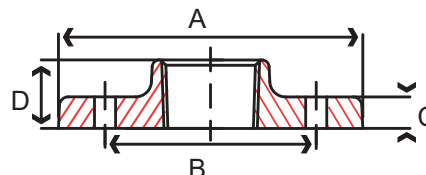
HF1 – 125 lb. Threaded Hydrant Flange
